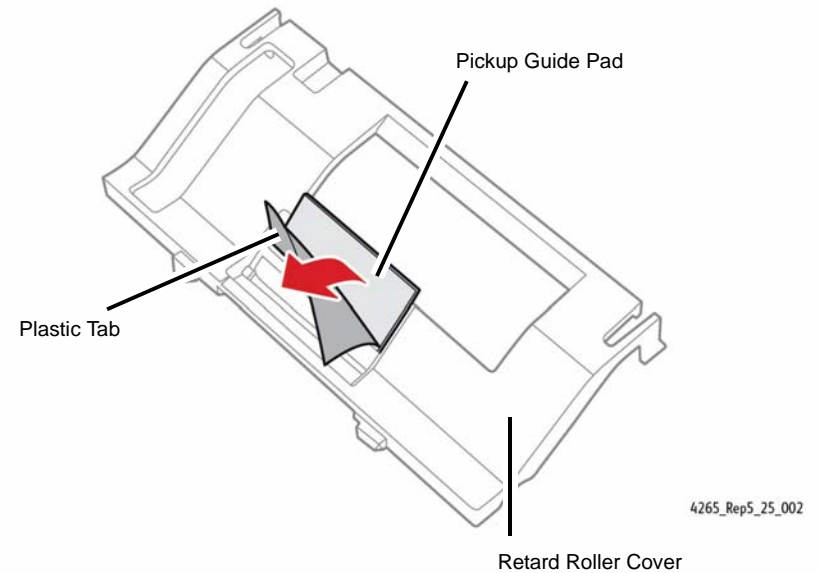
Inspecting/Replacing the Pickup Guide Pad
